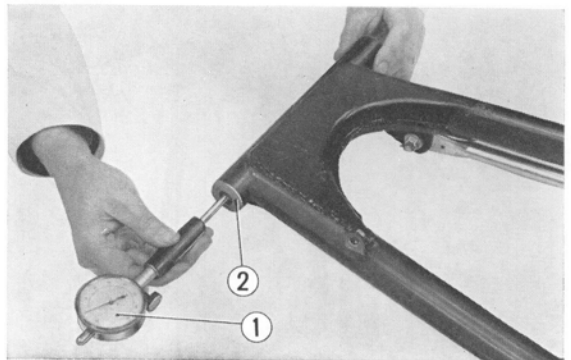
① Inside dial gauge ② Rear fork bushing
